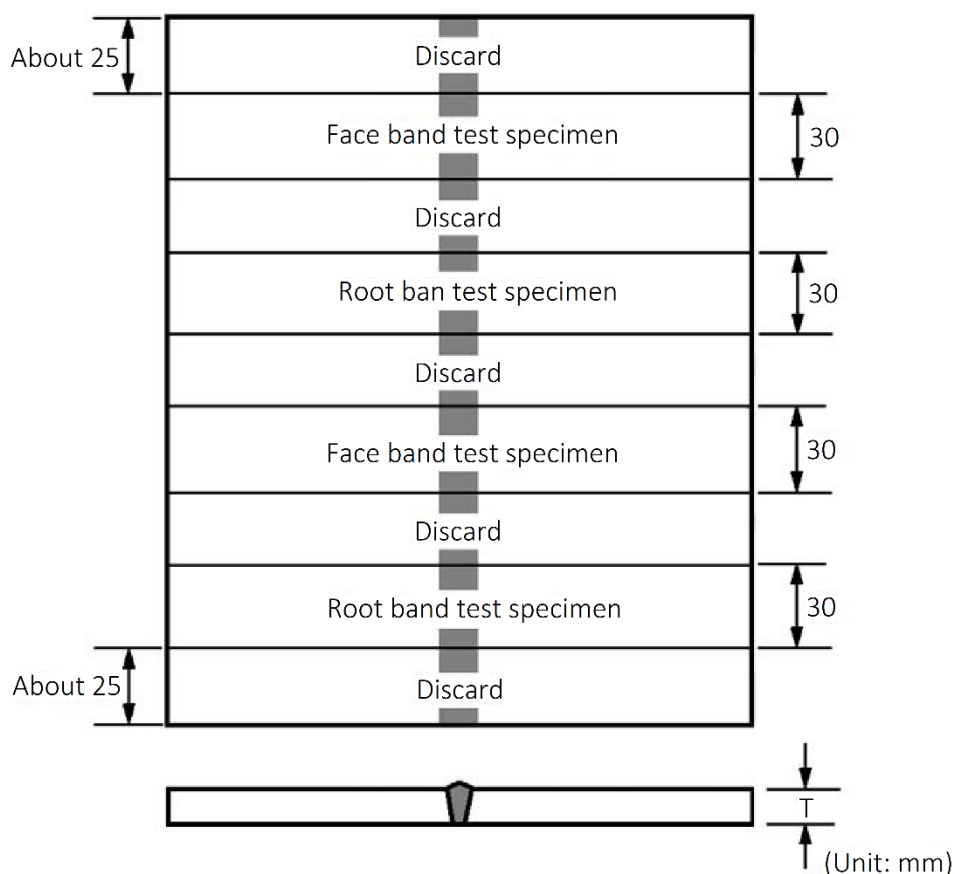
Dimensions and types of test assembly for butt welds ($T < 12$ mm)
